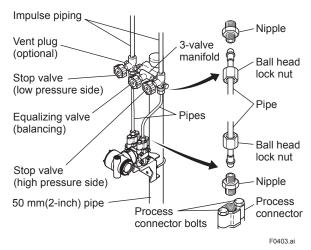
3-Valve Manifold (Pipe-Mounting Type)
